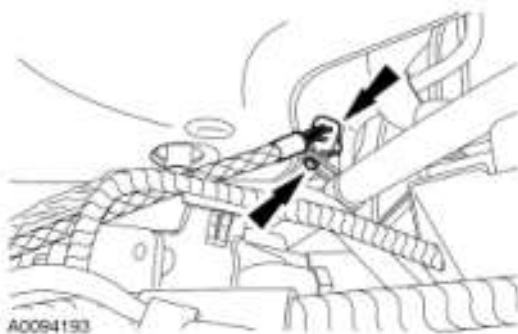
Locating Transmission Filler Tube Bolt
